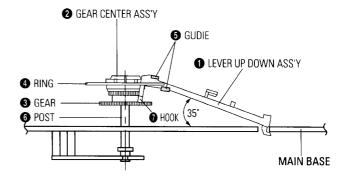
Assembly of Lever Up Down Ass'y, Gear Center Ass'y
